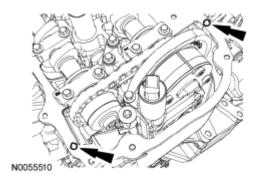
Applying RTV Silicone To Engine Front Cover-To-RH Cylinder Head Joints Courtesy of FORD MOTOR CO.
